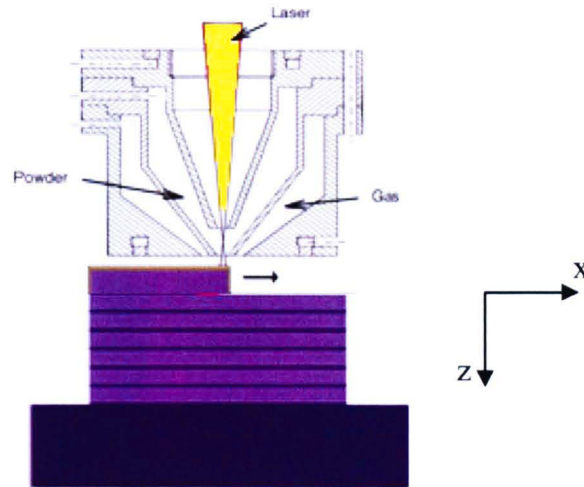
Coaxial nozzle assembly showing path of laser, powder delivery and shielding gas delivery system
